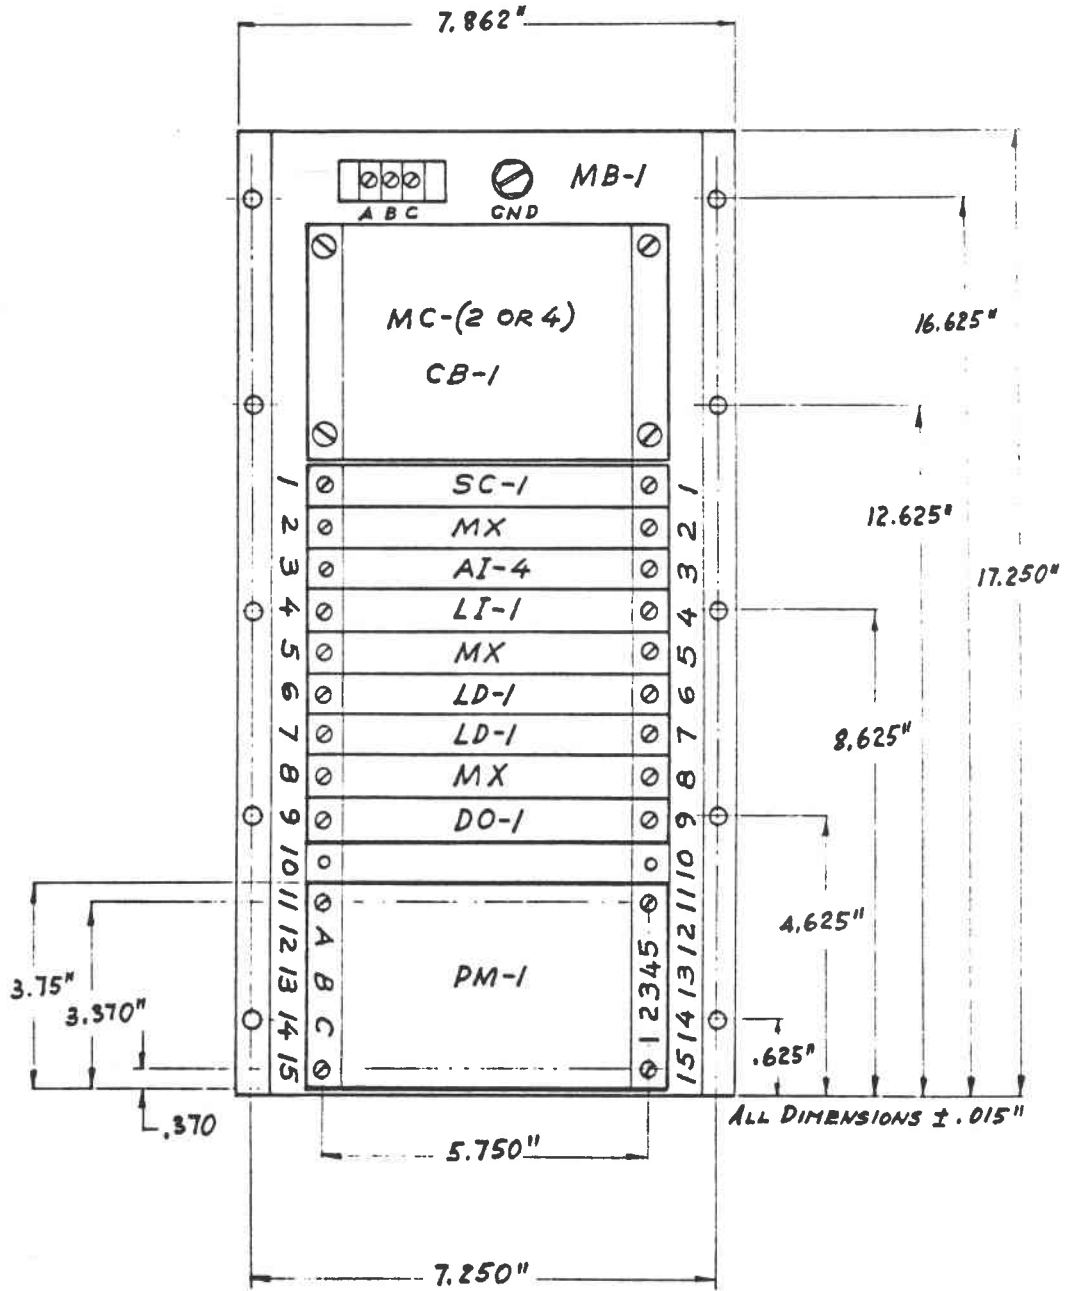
MECA MOUNTING DIMENSIONS
